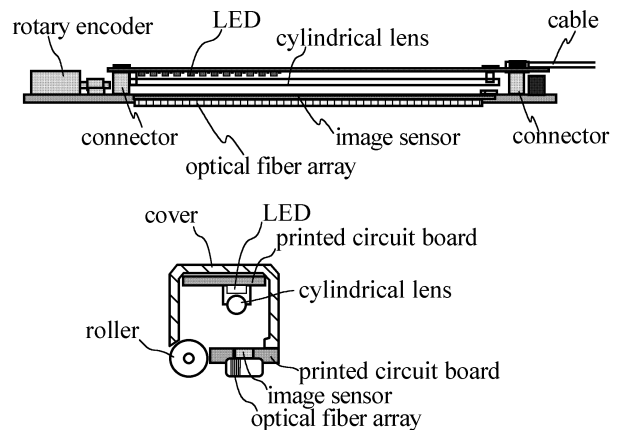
Cross-sections of a pen-shaped hand-held scanner.
